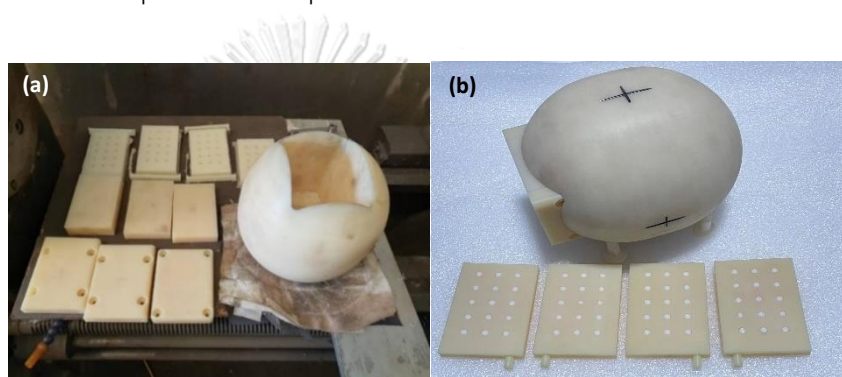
(a) fabricated cast nylon head phantom parts using CNC technique, consisting of head drilled sphere for head phantom and alanine box set, and (b) completed set of fabricated cast nylon head phantom.
